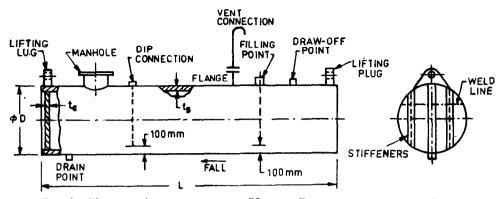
TYPICAL ARRANGEMENT OF UNDER-GROUND HORIZONTAL TANK
